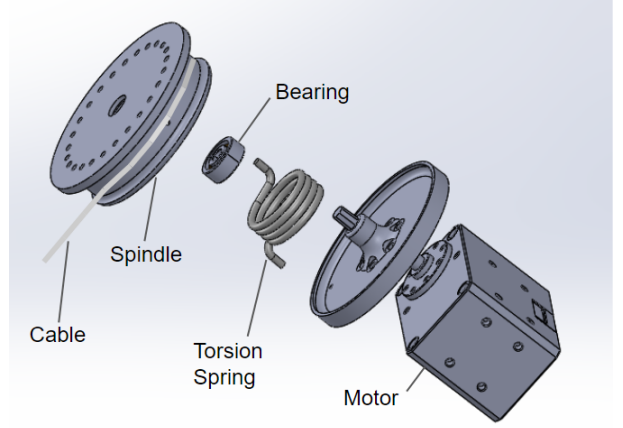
Exploded view of a motor and spindle system with a torsional spring coupling them.
